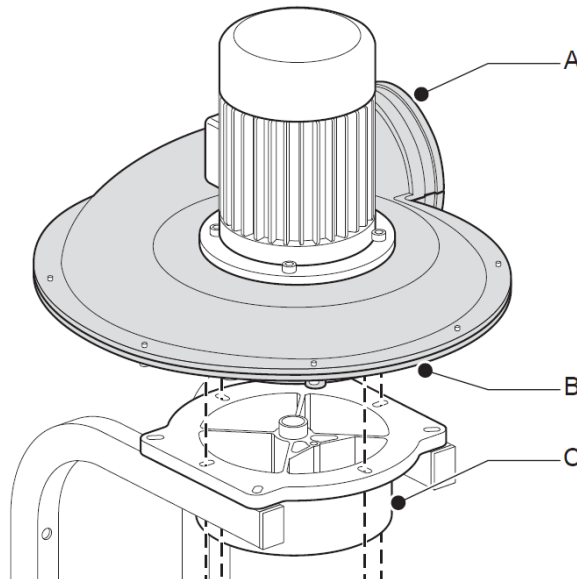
Prism™ 2400 Stationary Fan Mounting
